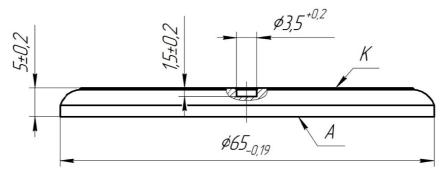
Dimensions of D066-12500 welding diode in housingless design.
